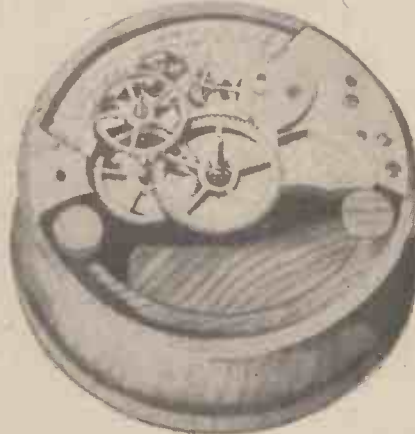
A wooden setting-up block for re-assembling the movement after cleaning.
